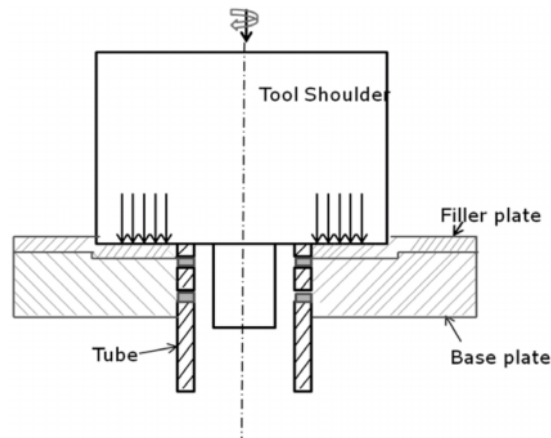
Tool Shoulder Contact with Filler Plate during FWTPET Process
